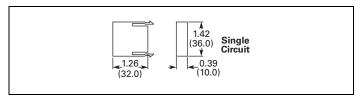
Contact Blocks with Quick Connect Terminal Assembled
